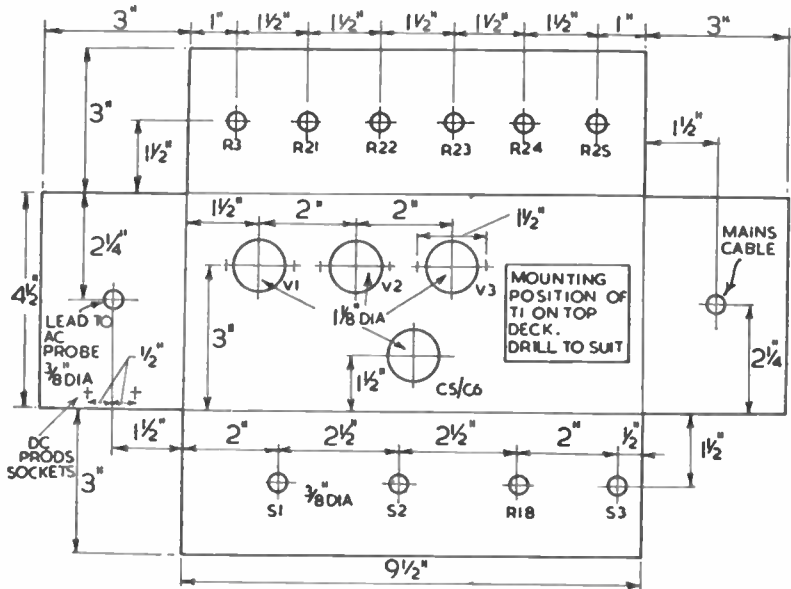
CHASSIS LAYOUT OF THE VALVE VOLTMETER (TOP VIEW)
